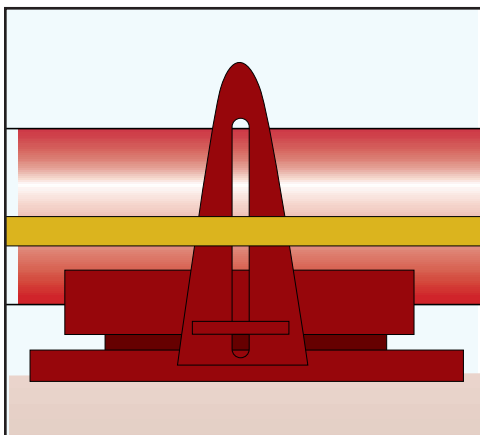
ADJUSTABLE BEARING STAND SET UP
